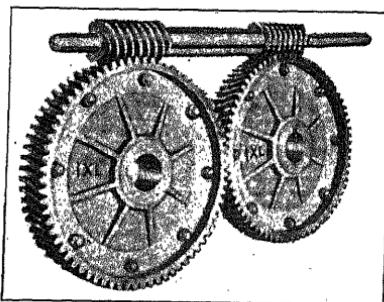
Tandem worm gears. The worms are triple thread, right- and left-hand, so that the gears mesh. This eliminates end thrust and prevents back pressure. Foote Bros. Gear Co., Chicago.
